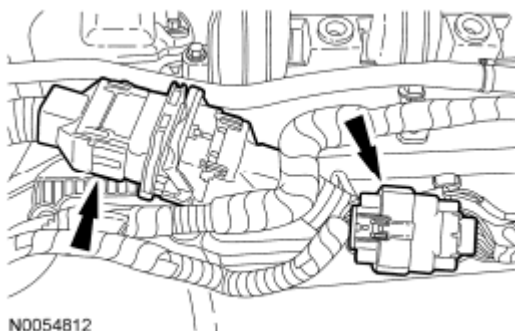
Locating Engine Control Wiring Harness Electrical Connectors
